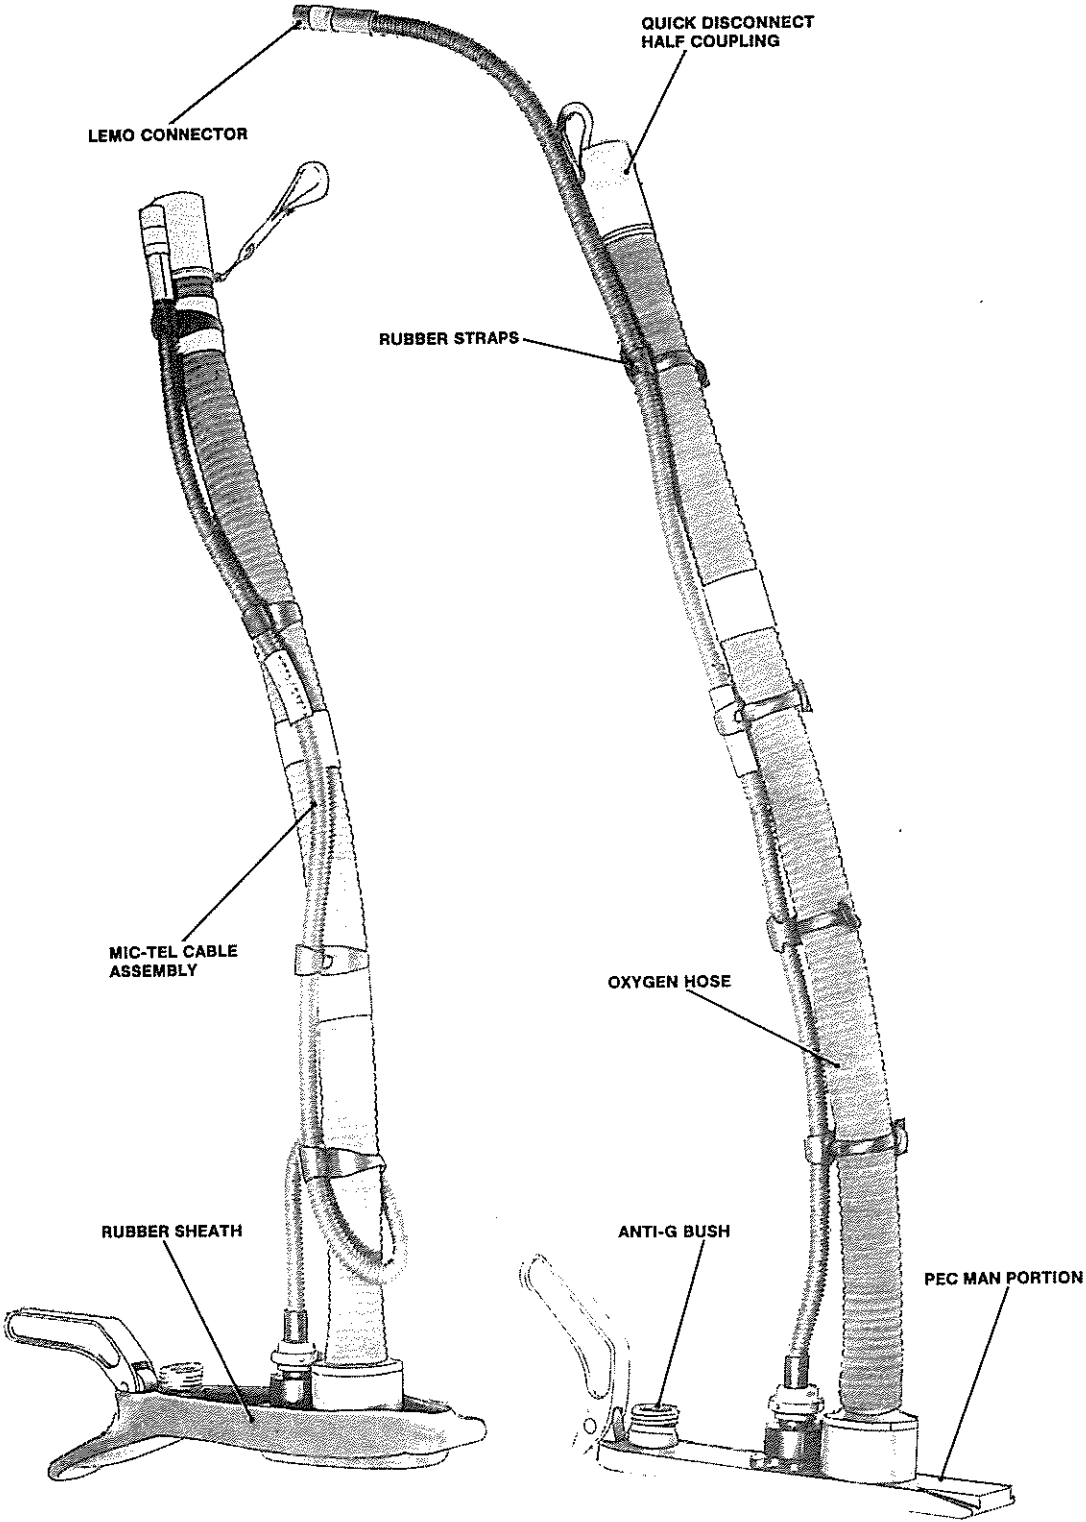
Oxygen mask hose assembly Mk 12 (showing approved method of shortening the mic-tel cable assembly)
